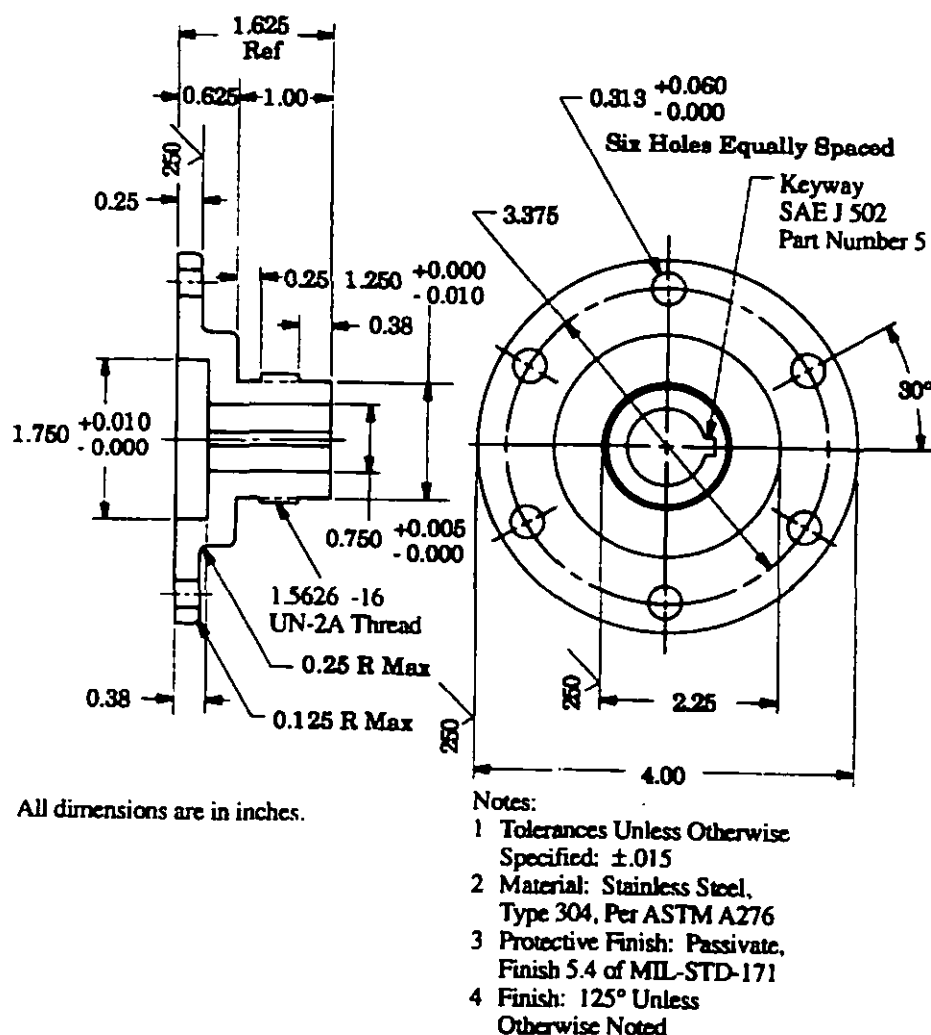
Drawing Without Positioning Controls (Ref. 9)
